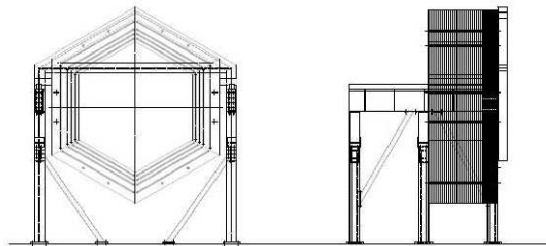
Engineer's drawing showing front and side view of the MINERνA detector stand.
